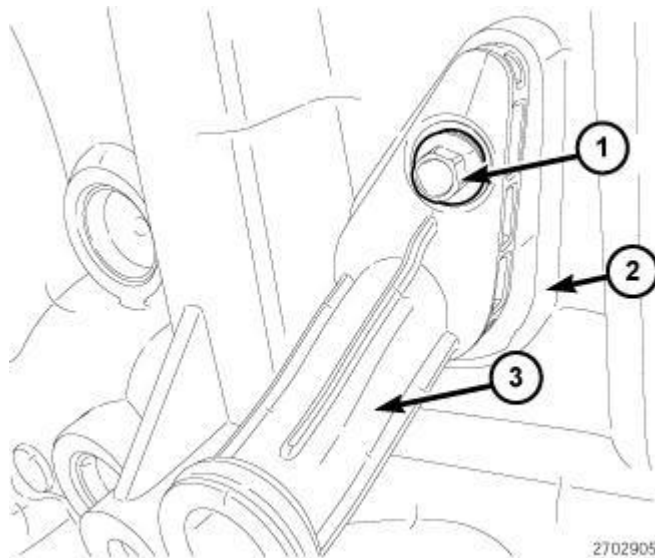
IDENTIFYING COOLANT TUBE, ENGINE BLOCK & BOLT
